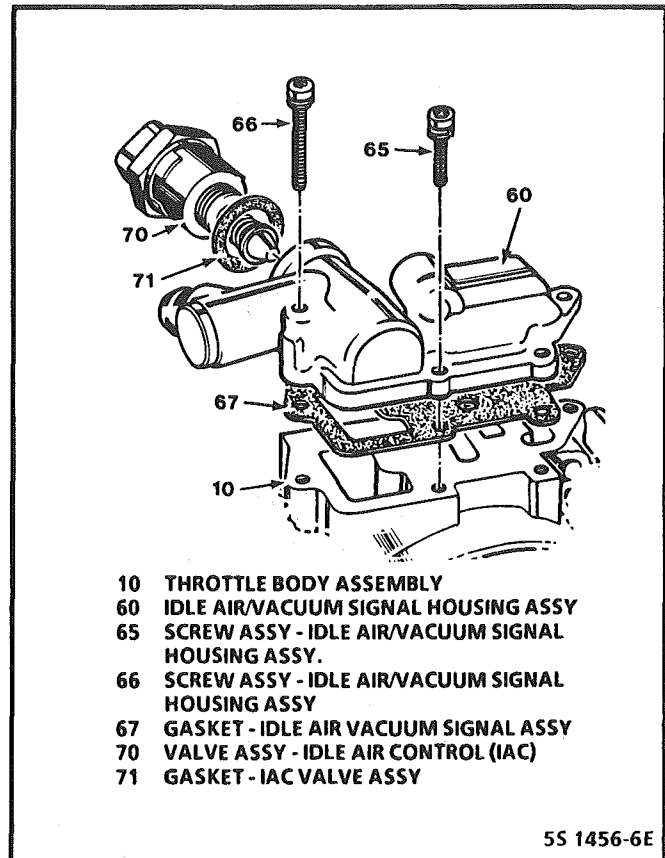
Idle Air/Vacuum Signal Housing Assembly
